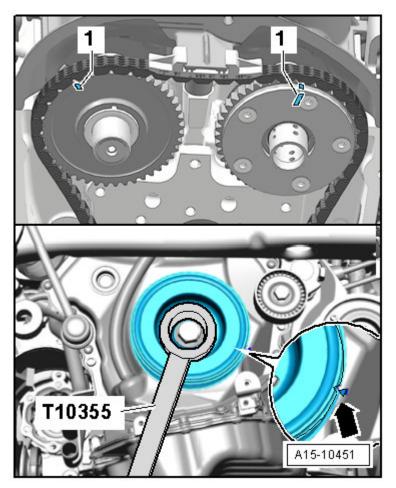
Identifying Vibration Damper Rotated Into "OT" Position Using Counter Hold Tool T10355 Courtesy of VOLKSWAGEN UNITED STATES, INC.
